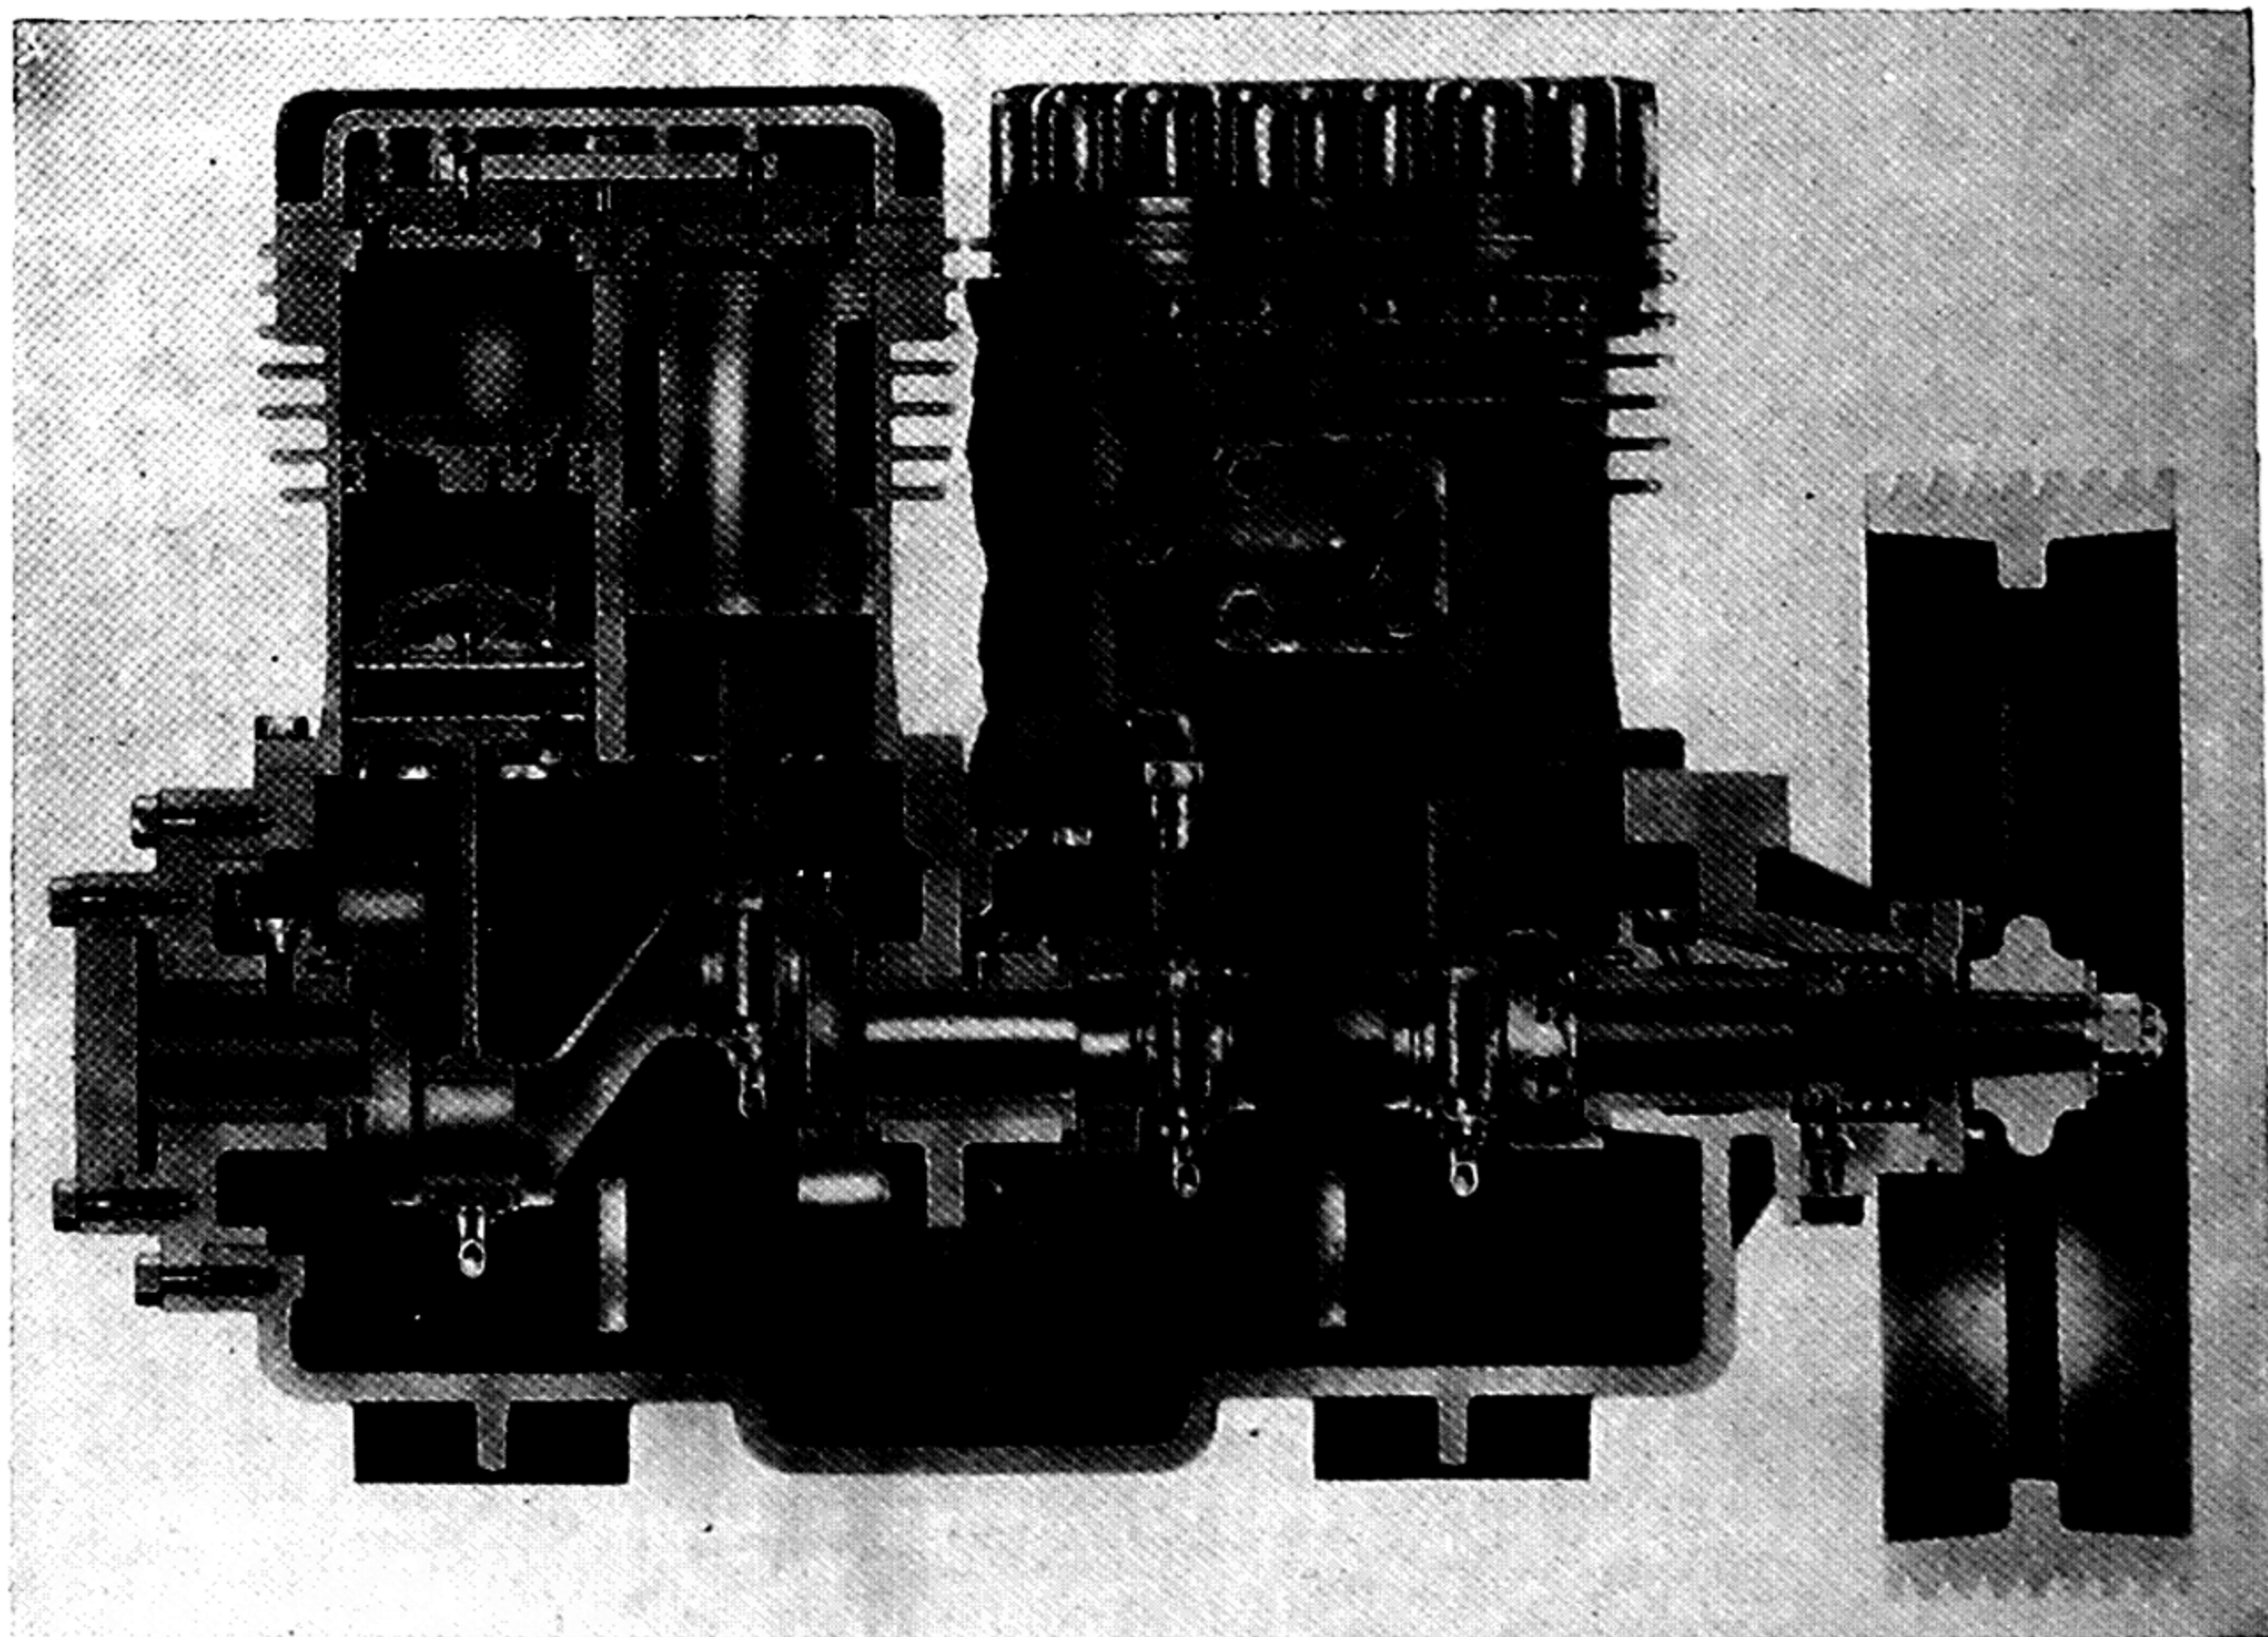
Vertical compressor with uniflow valve arrangement. Courtesy Carrier Corp.
